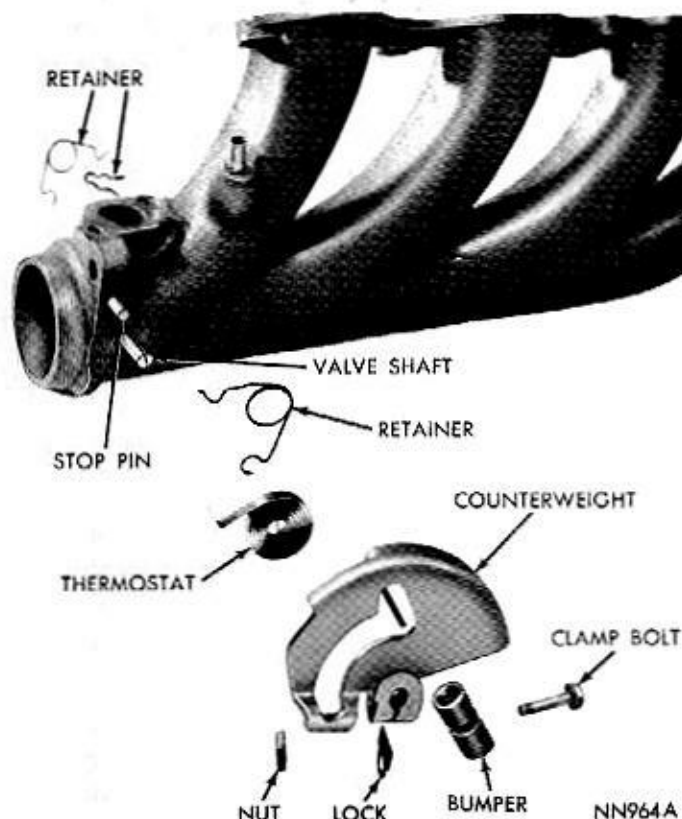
Heat Control Valve—Disassembled (426 Hemi Engine)
